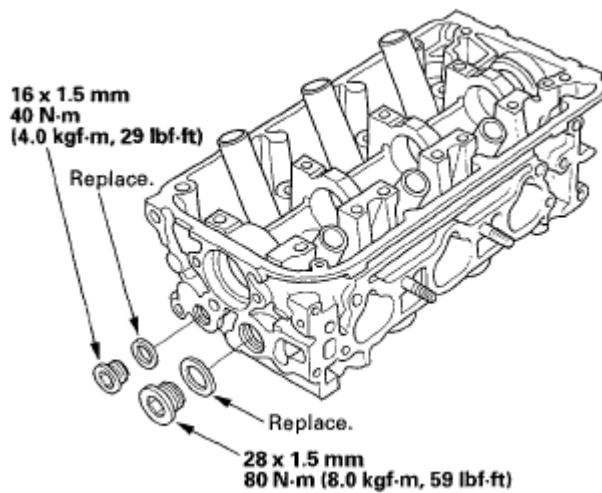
Identifying Sealing Bolt Washer - Rear With Torque Specifications
